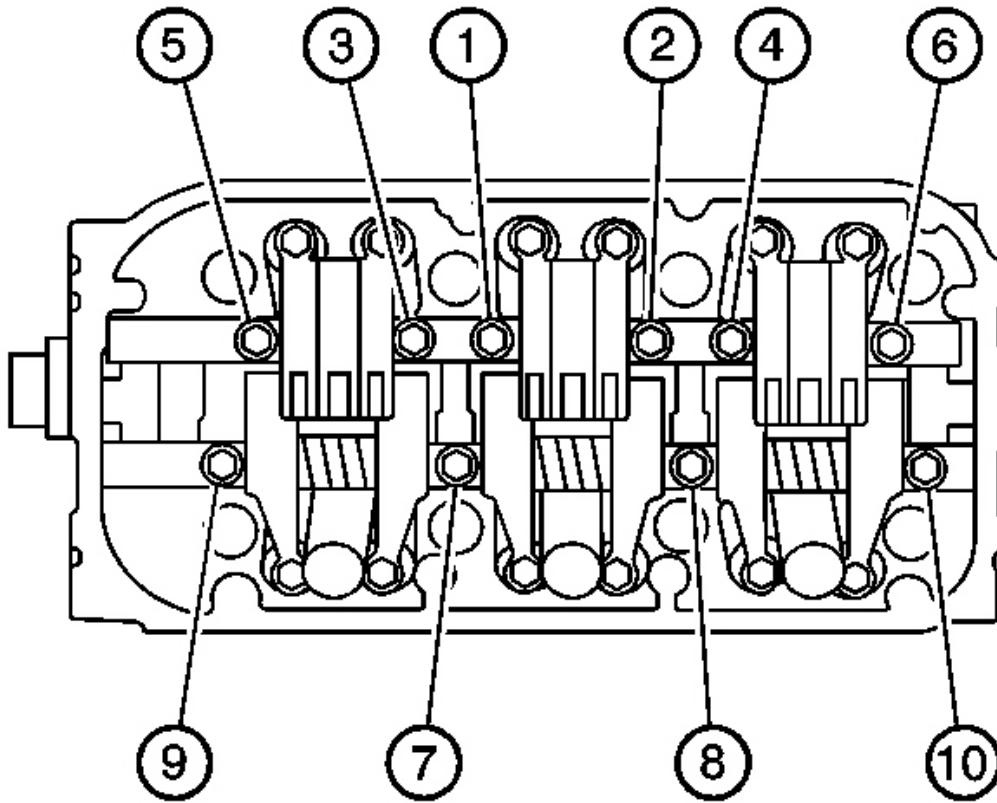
View Of Left Side Rocker Shaft Retaining Bolts
